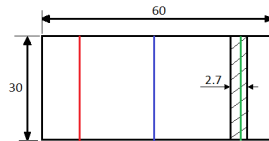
Nominal geometry of the bending test specimens with indicated markers showing where the measurements were taken.
